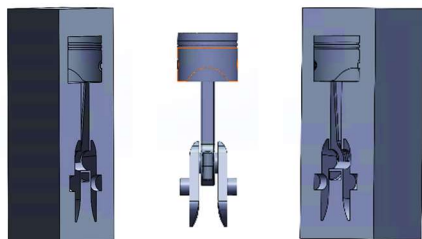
[centre] CAD image of piston insert geometry, [left and right] 2-part adaptor piece.
